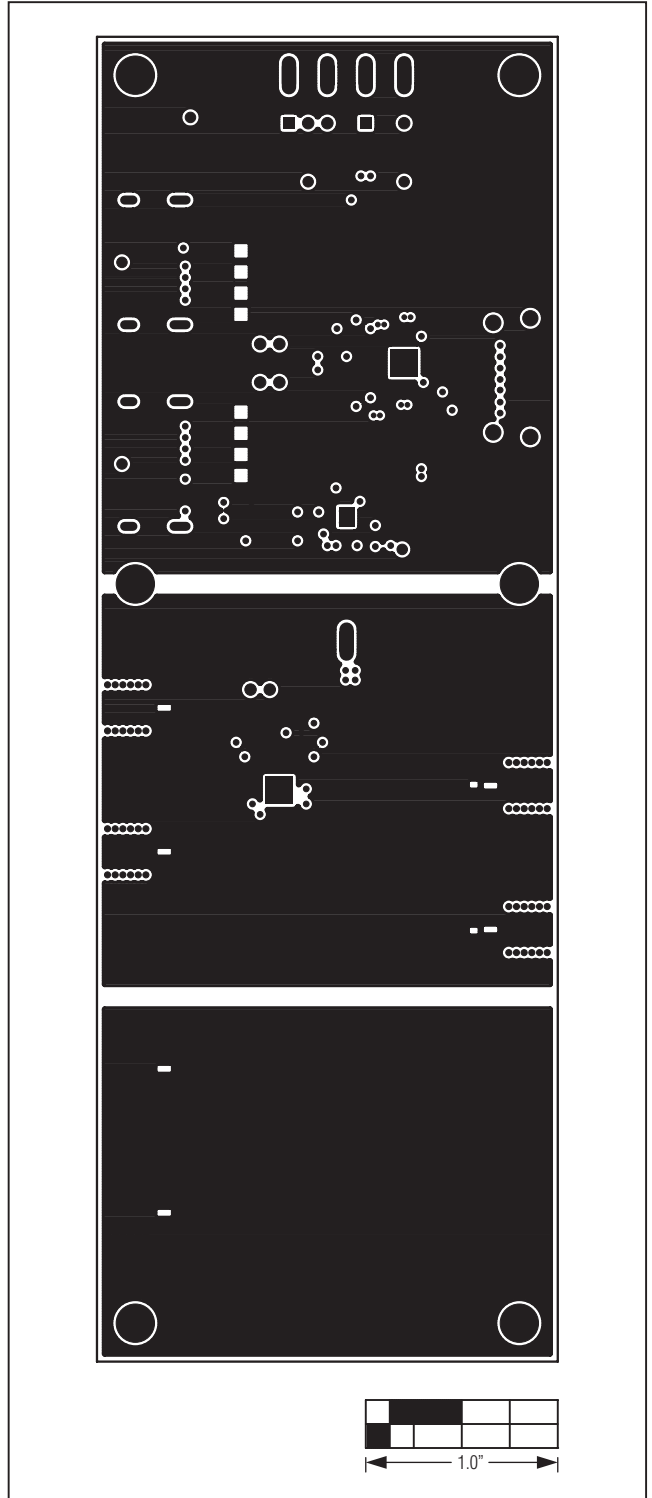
MAX14886 EV Kit PCB Layout—Inner Layer 3
